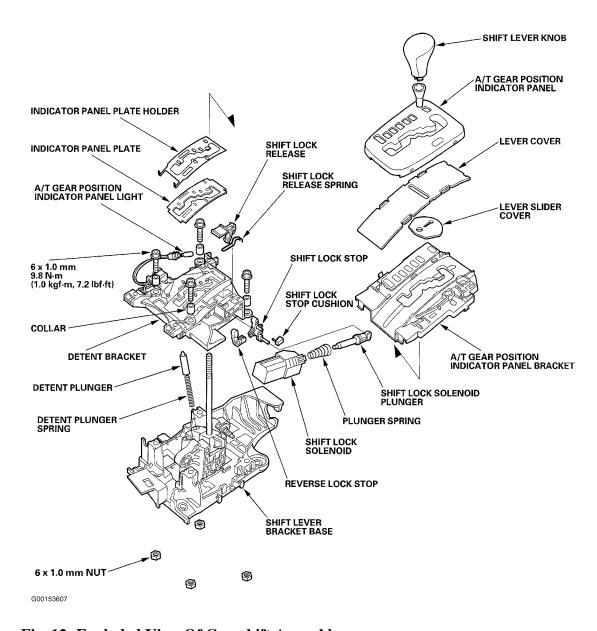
Exploded View Of Gearshift Assembly Courtesy of AMERICAN HONDA MOTOR CO., INC.
